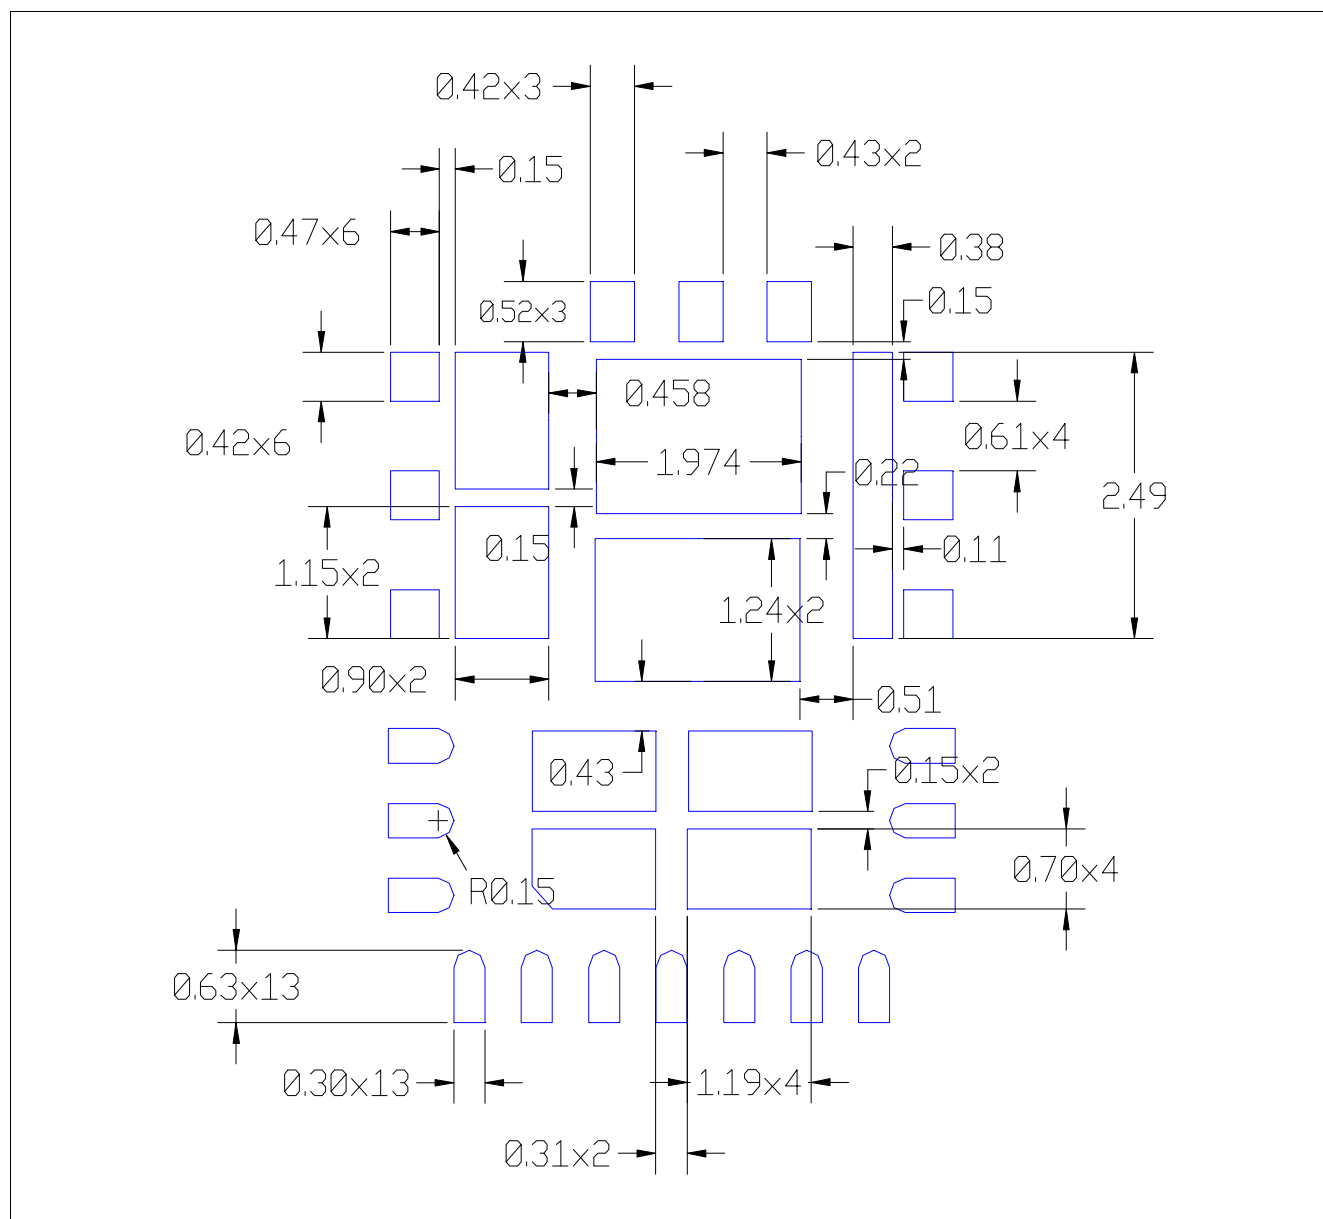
Stencil pad spacing (all dimensions in mm)
